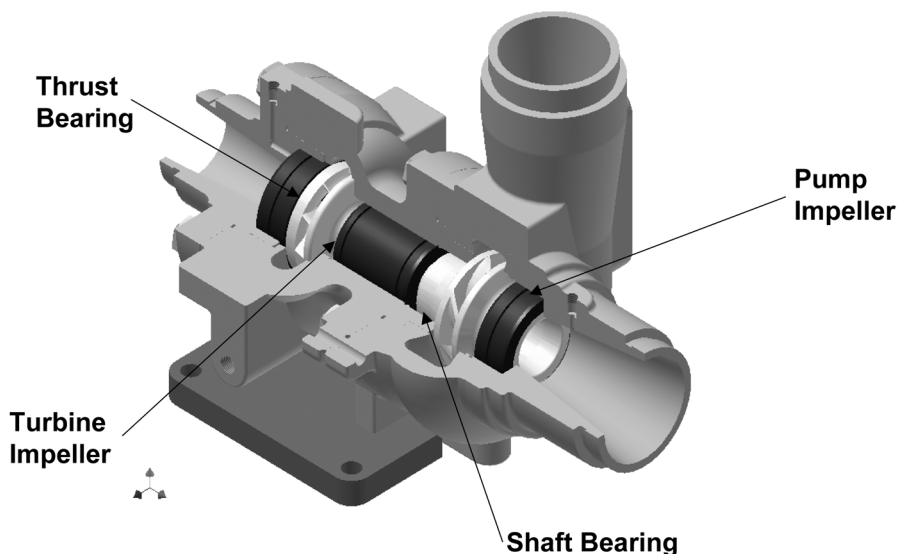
Sectional cut off of “Turbocharger” pumping device (courtesy of Pump Engineering).
